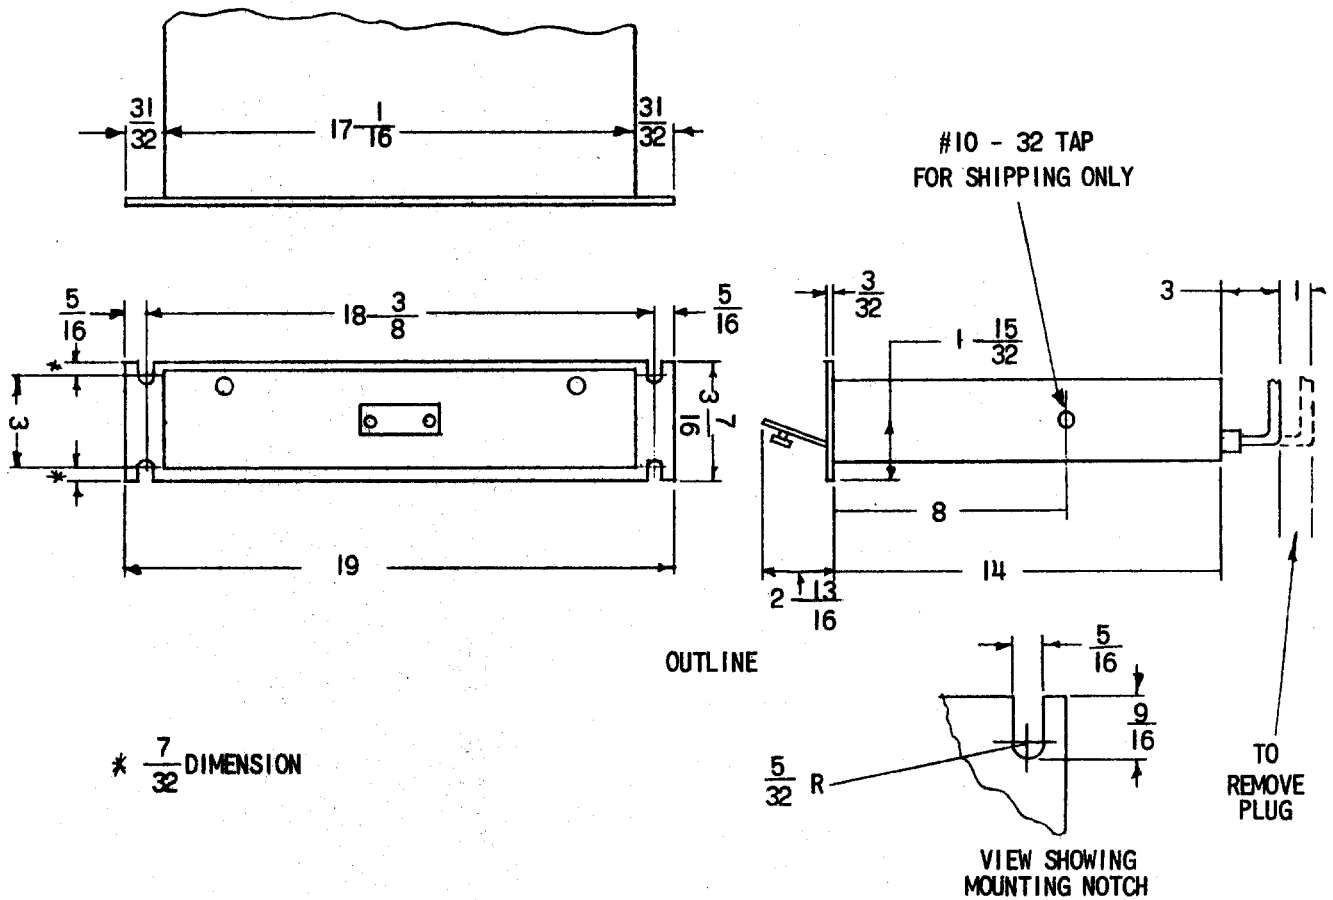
(0227A2036-0) Outline And Mounting Dimensions For The SLC51B Relay
